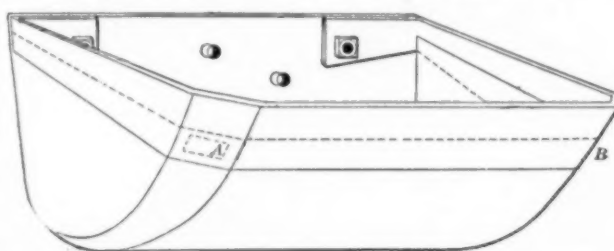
ISOMETRIC PROJECTION OF BUCKET WITH LIP ATTACHMENT SHOWING THE LIP BOLTED TO BUCKET.
